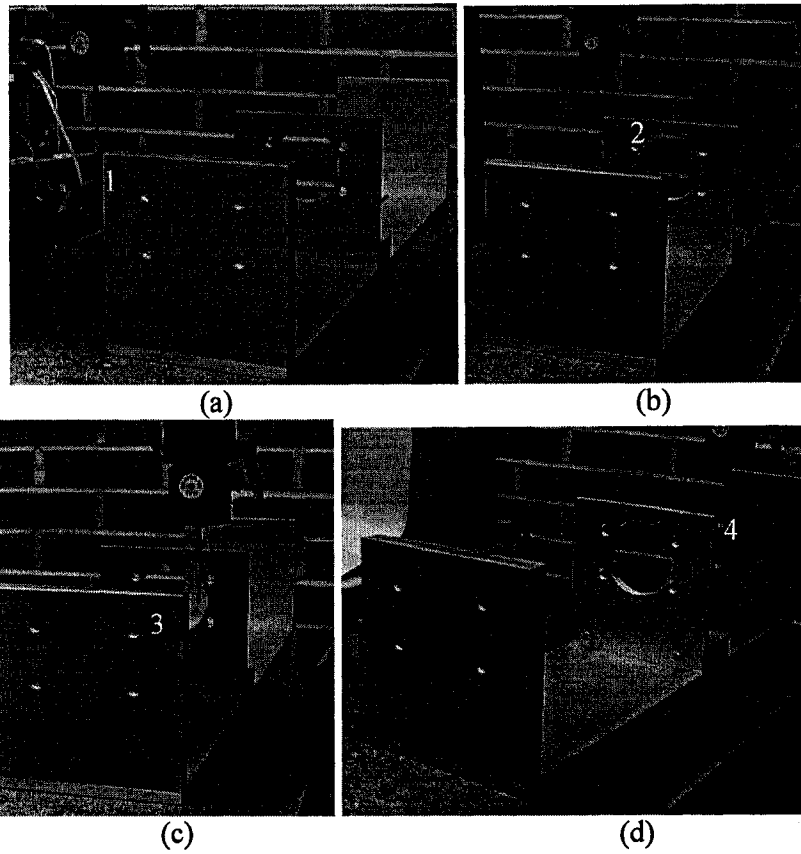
Aligning alignment jig in CMM machine; a) measuring front, left corner; b) measuring back, left corner; c) measuring front, right corner; d) measuring back, right corner
